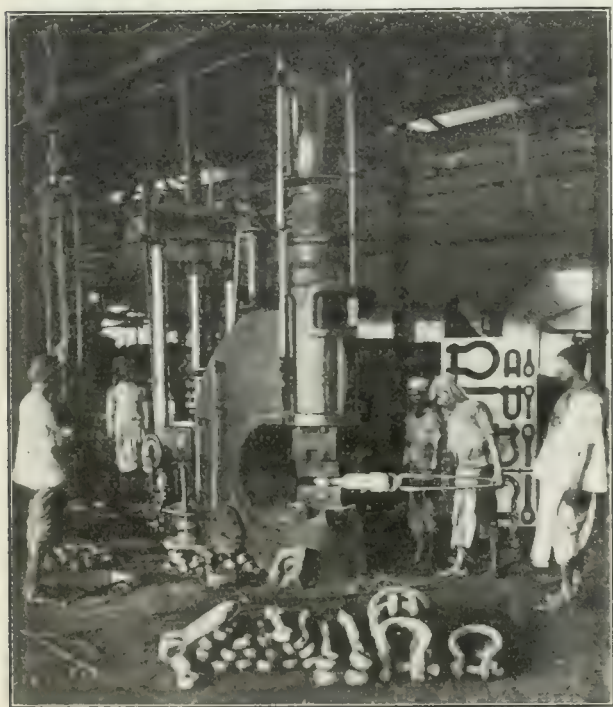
Forging Shackles with Unskilled Labor in India on a Hydraulic Press.
